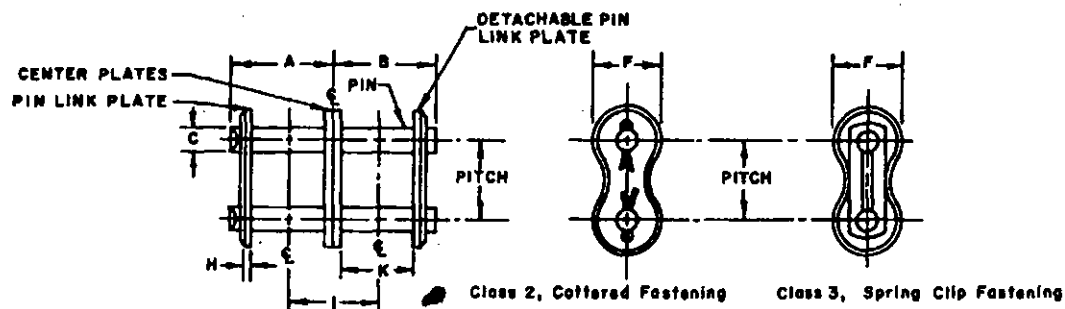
MULTIPLE STRAND LINK PLAN AND SIDE VIEWS
